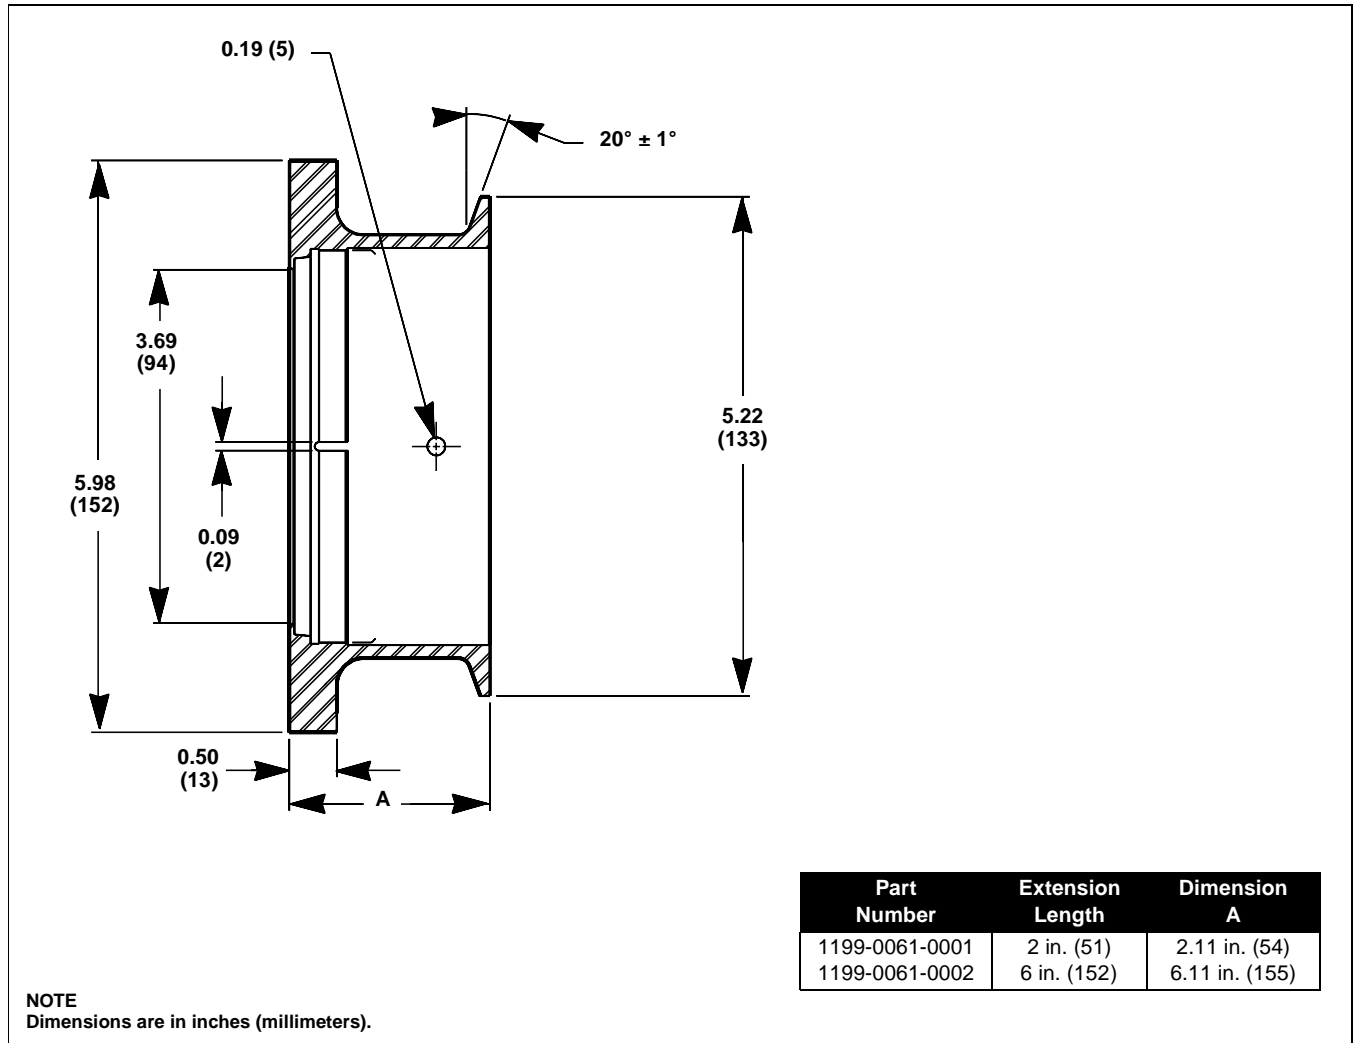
Dimensional Drawing of Sanitary Tank Spud.
